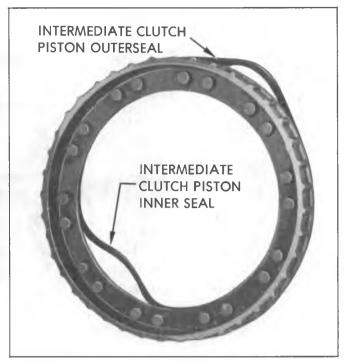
M--Removing Intermediate Clutch Piston Inner and Outer Seal
